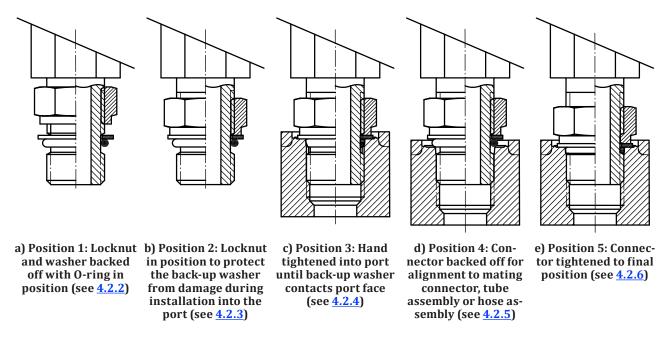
Illustration of instructions for assembling connectors with adjustable stud ends and O-ring sealing
